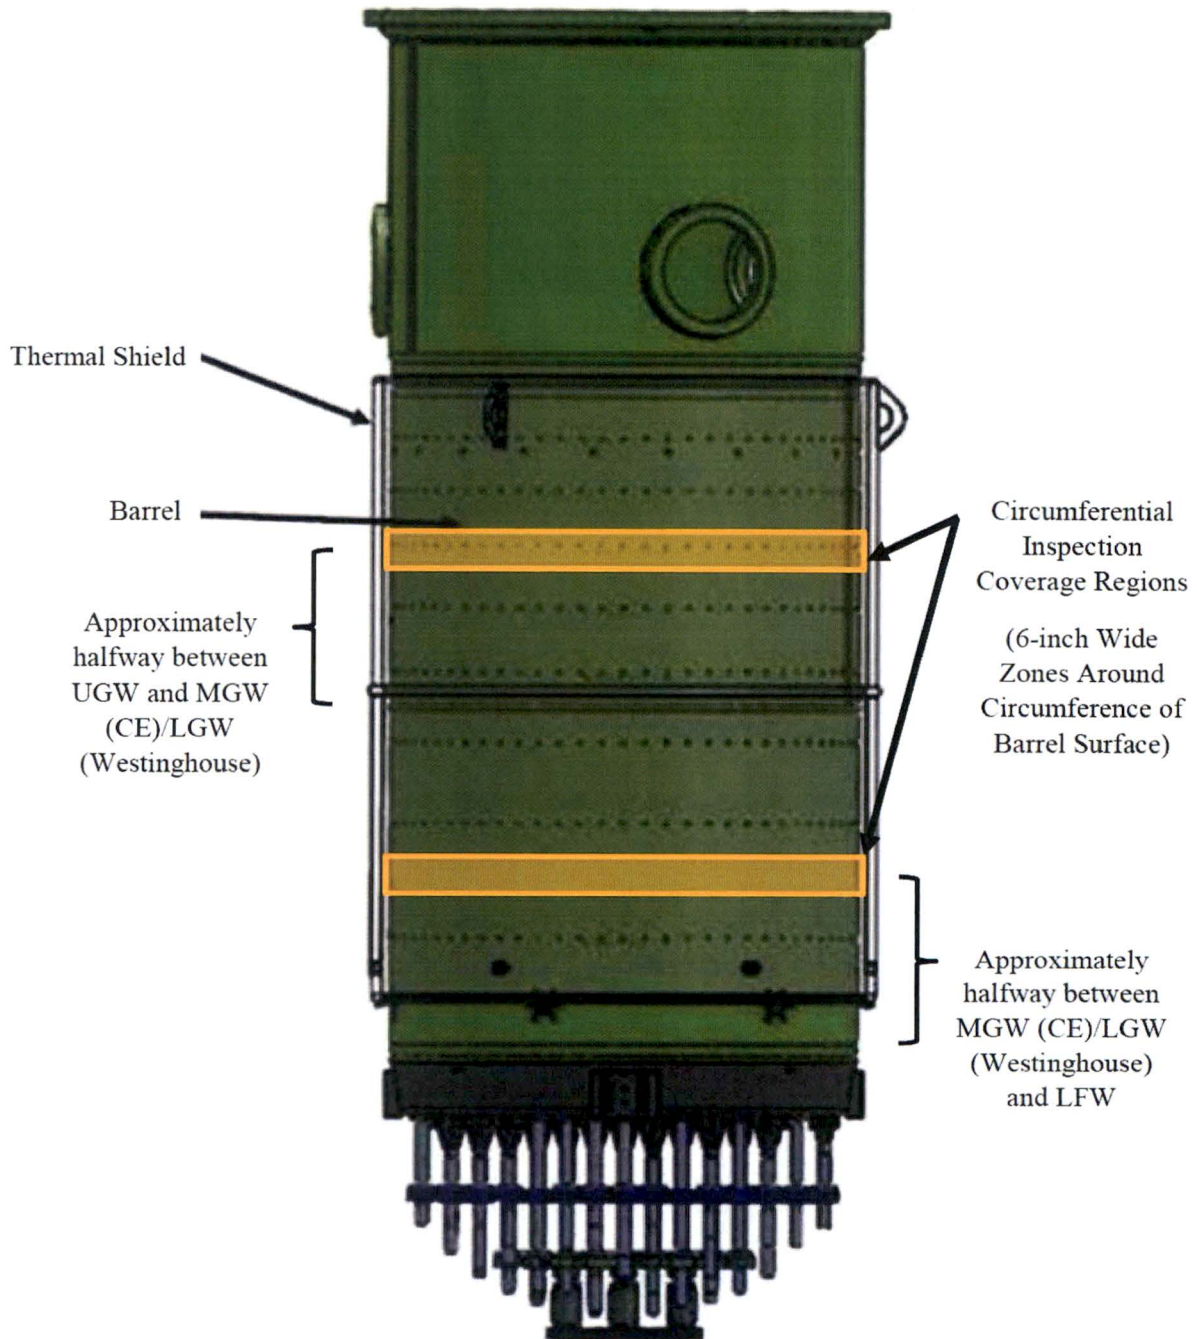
CE or Westinghouse Thermal Shield Inspection Option – Unknown Axial Weld Locations
